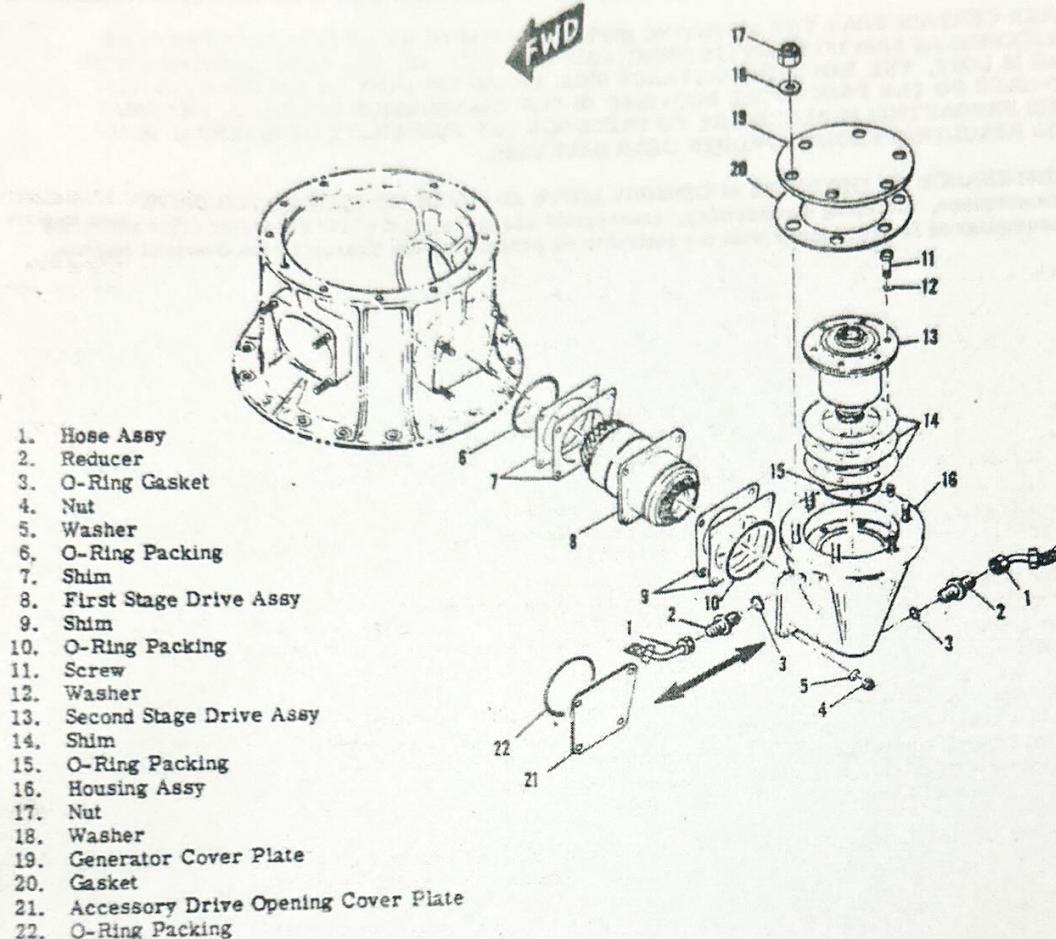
Optional Accessory Drive Adapter Kit (Generator Drive Assembly)
